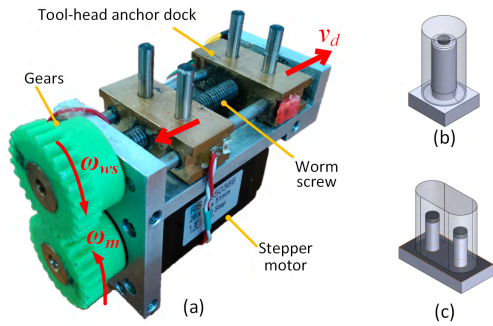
a) Detail of the final mechanical design used, b) First anchoring system, and c) Final system for attaching the tool heads.
